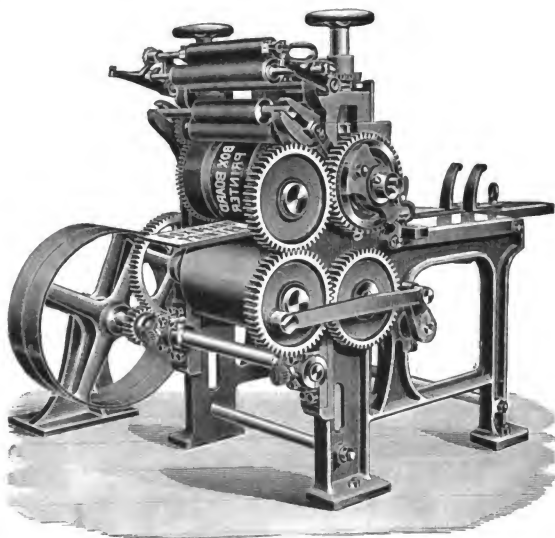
BOX-BOARD PRINTING MACHINE.
